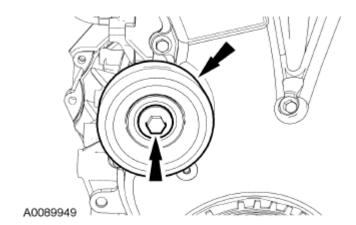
Locating Bolt And Accessory Drive Belt Idler Pulley Courtesy of FORD MOTOR CO.
